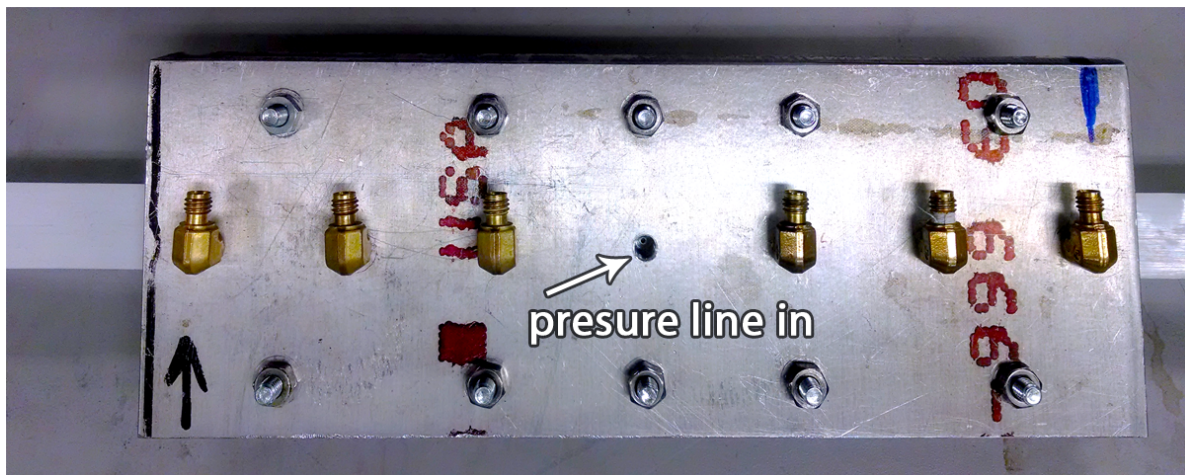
Fittings concentric to the small test holes. Copper tubes transfer the fluid pressure to the pressure sensor in order to be read.
